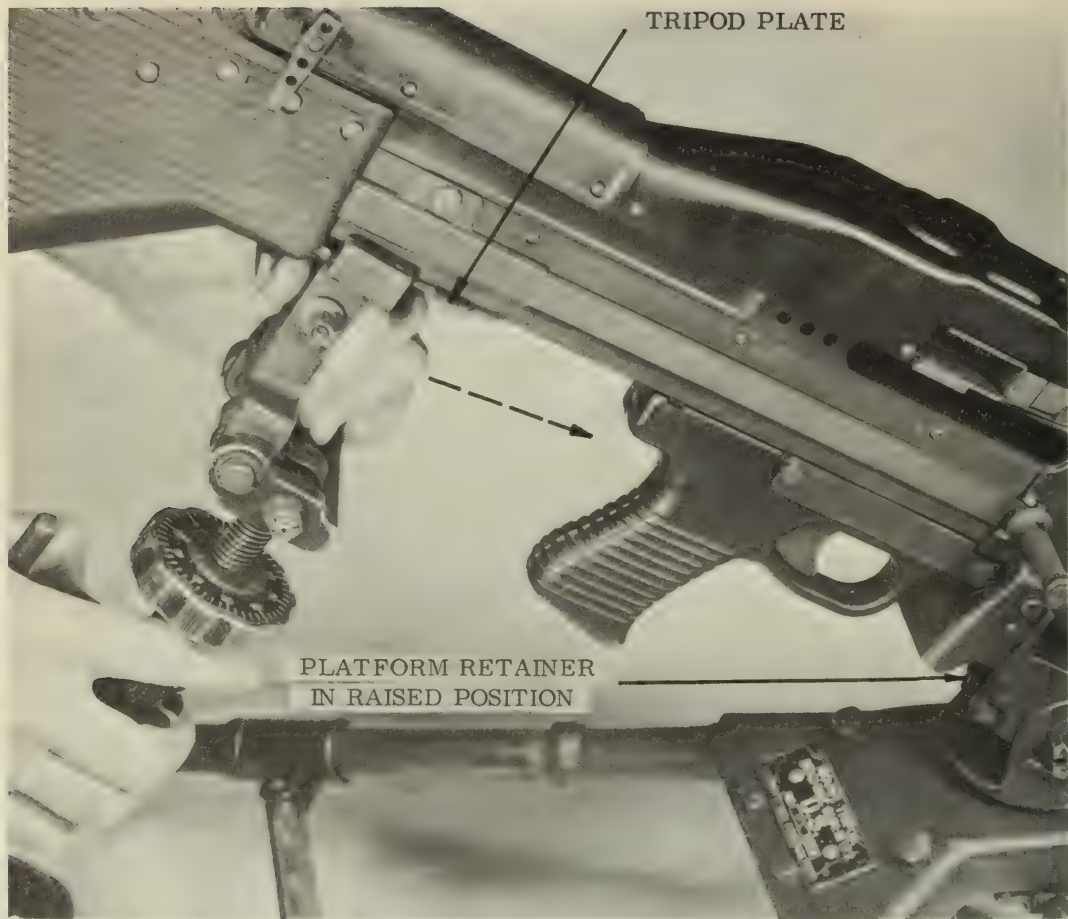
Mounting the Traversing and Elevating Mechanism on the Tripod.
